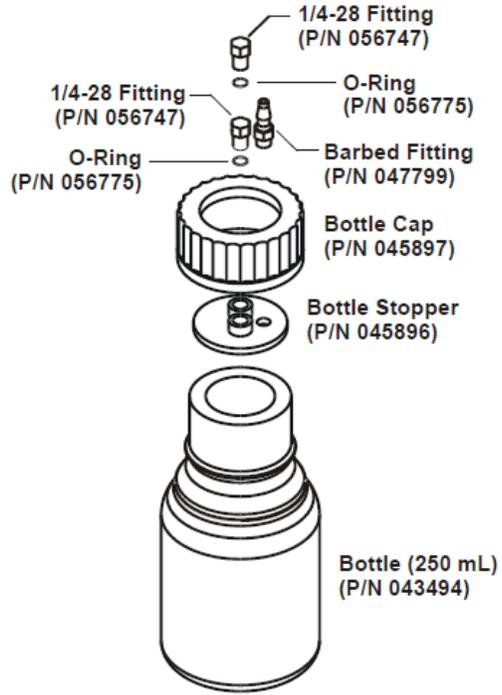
250 mL Bottle Assembly (Fluid Trap)
